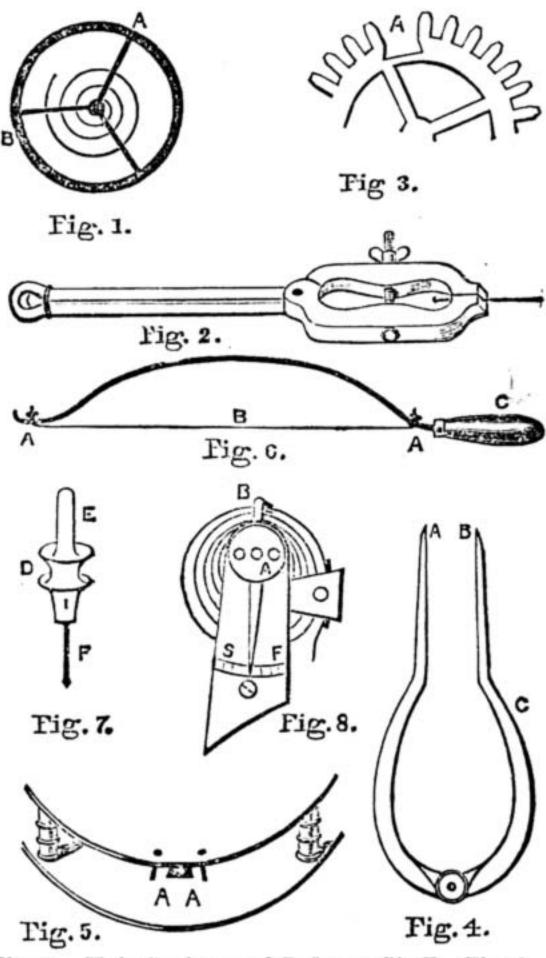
Hair Spring and Balance Staff. Fig. 2.—
